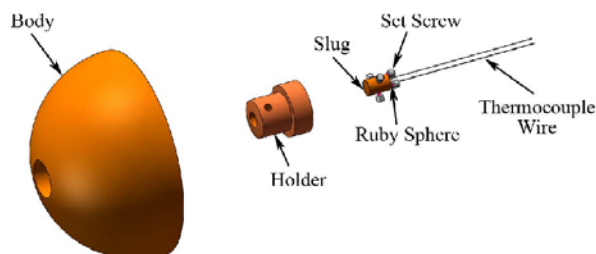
Typical assembly drawing for hemispherical slug calorimeter
